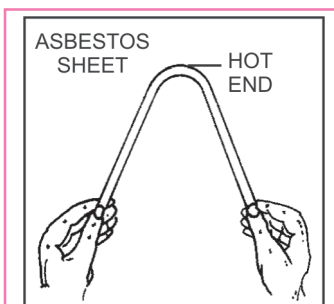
ADJUSTING THE EXACT ANGLE AND MAKING THE BENT TUBE COPLANAR
